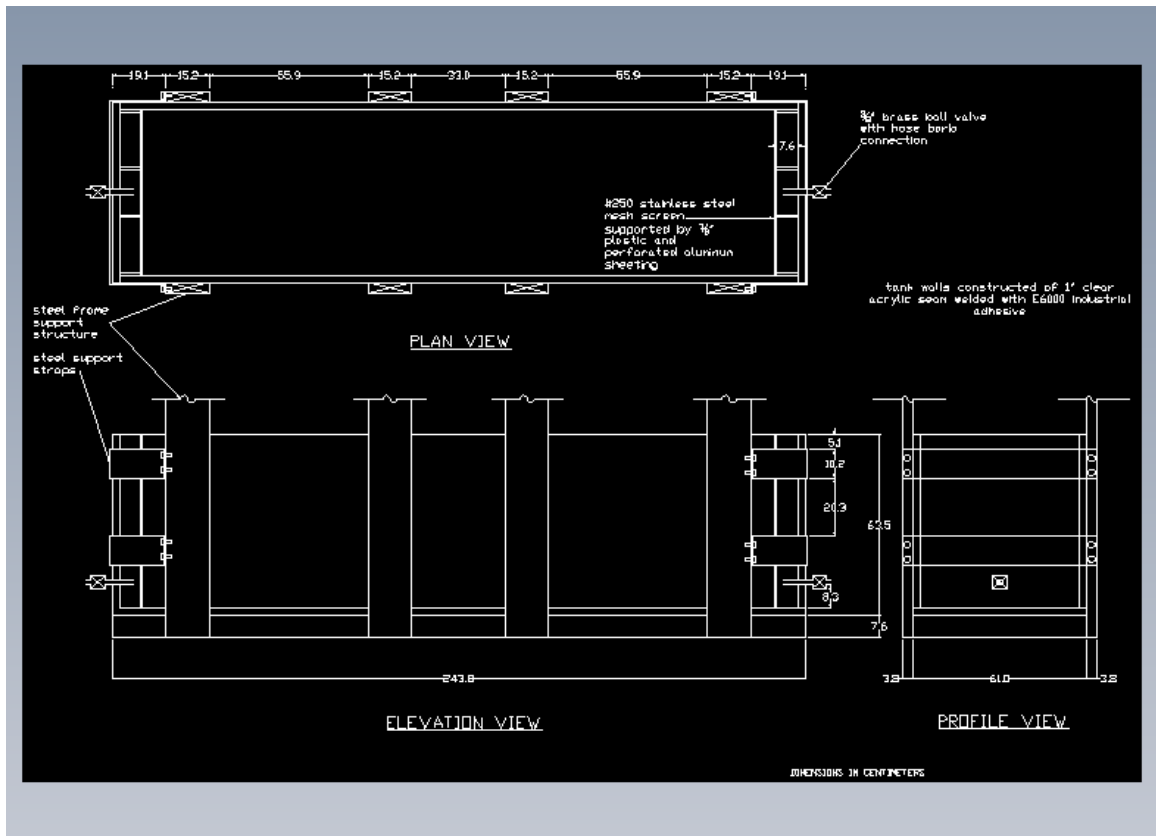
Schematic of tank #3 construction, all dimensions in centimeters. Drawing completed by Jason Peterson.
